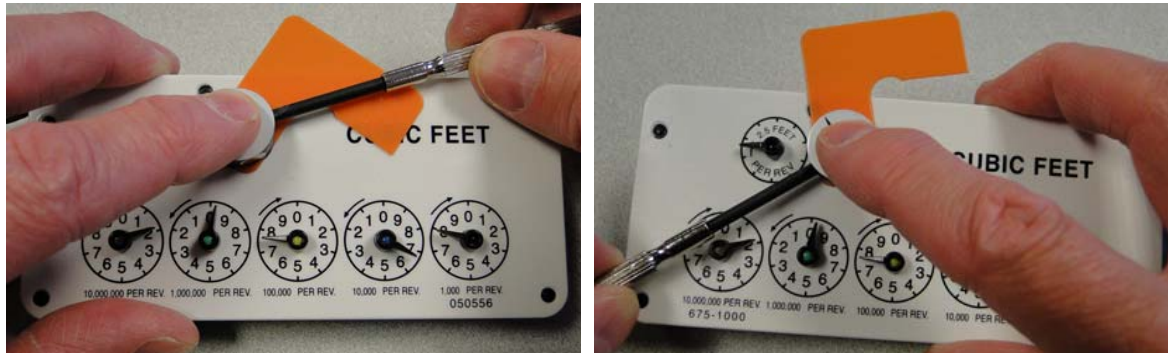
15. Tighten Dial Wheel Screws to 1.2 ± 0.10 Inch-Pounds
